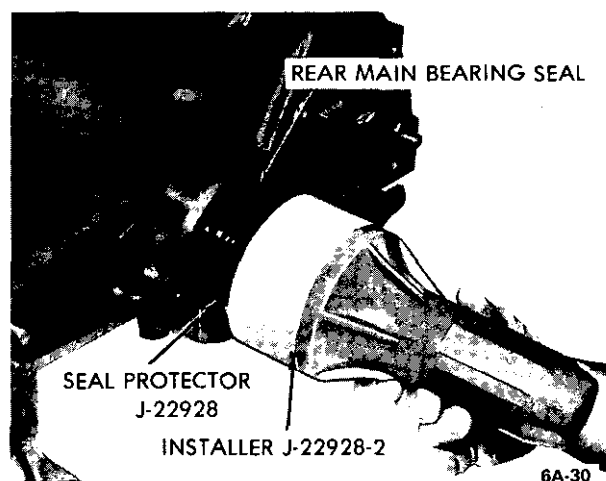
A-30 Installing Rear Main Bearing Oil Seal
